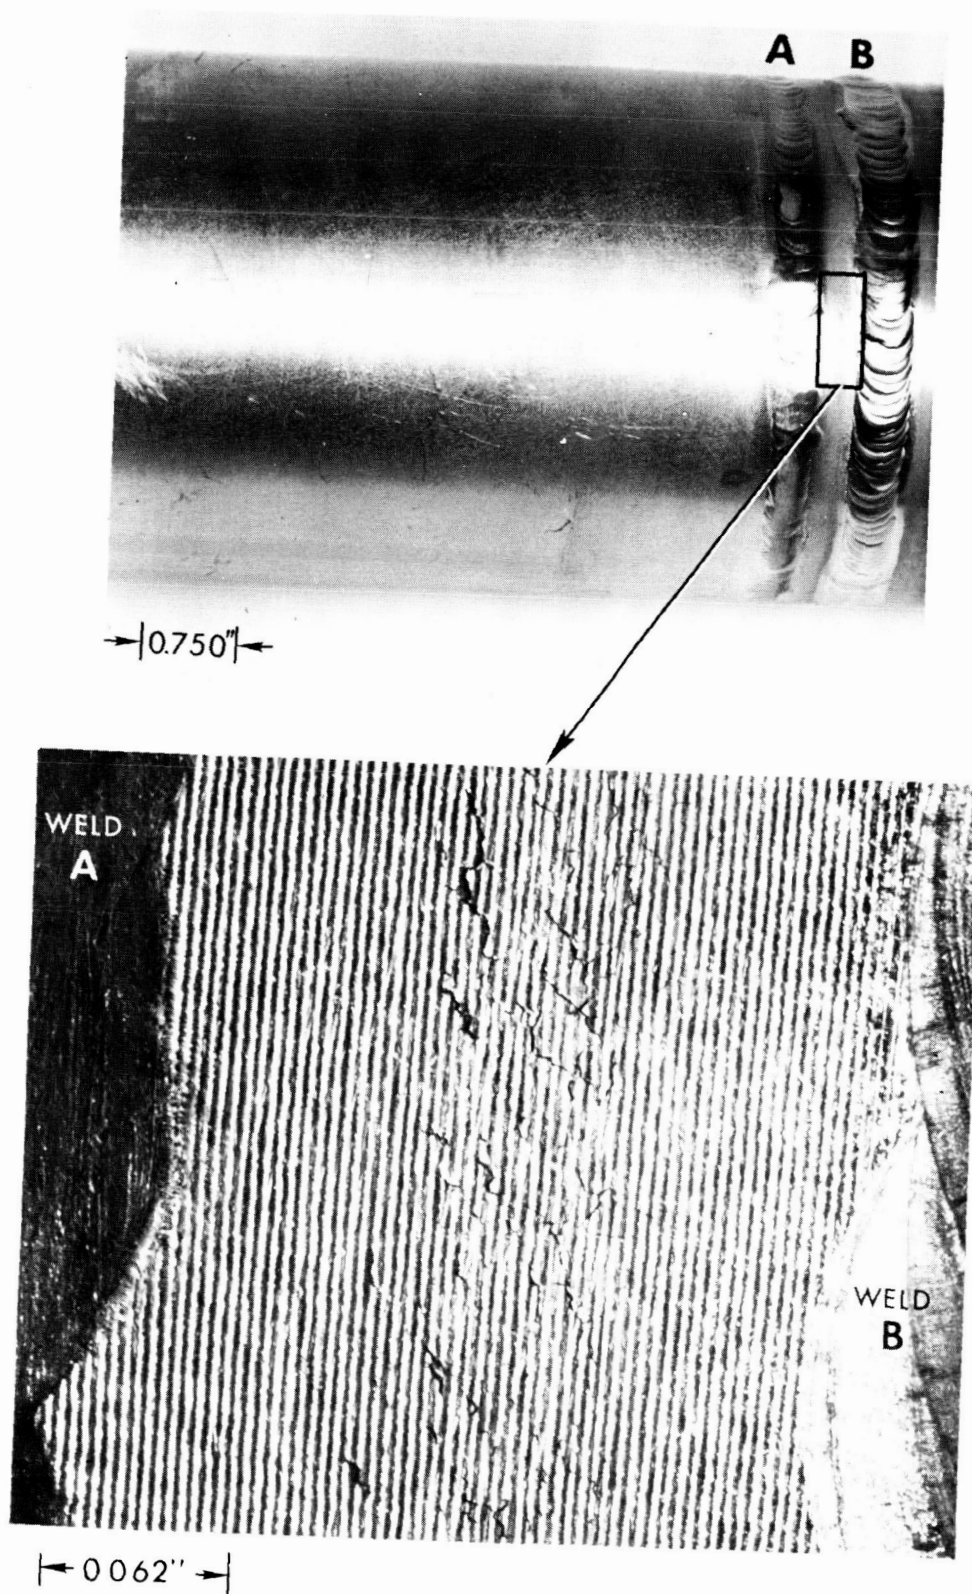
Typical area of cracking between GTA welds of T-111 alloy EM pump duct.
